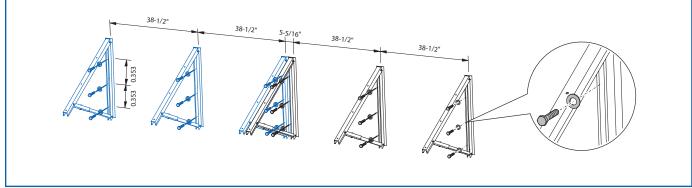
Wall mounting with wall support standard kit and wall support extension kit (blue); dimensions in inches
